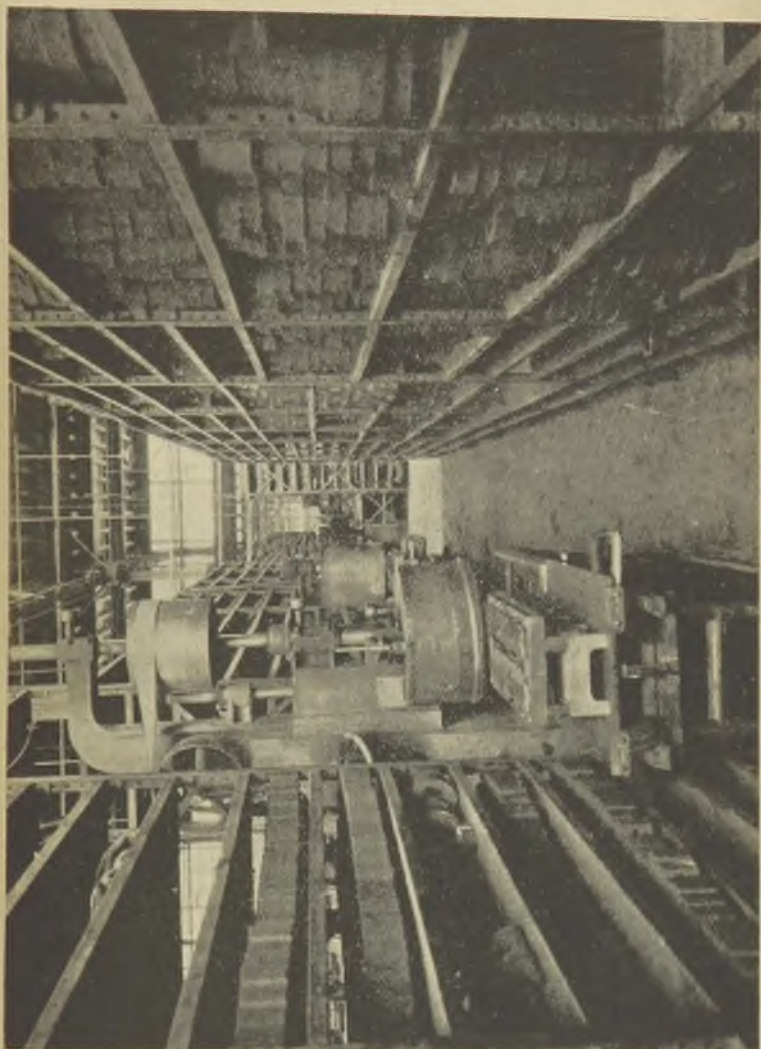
SURFACE GRINDING AND BORING MACHINE FOR CYLINDER WATER JACKET CORES.
